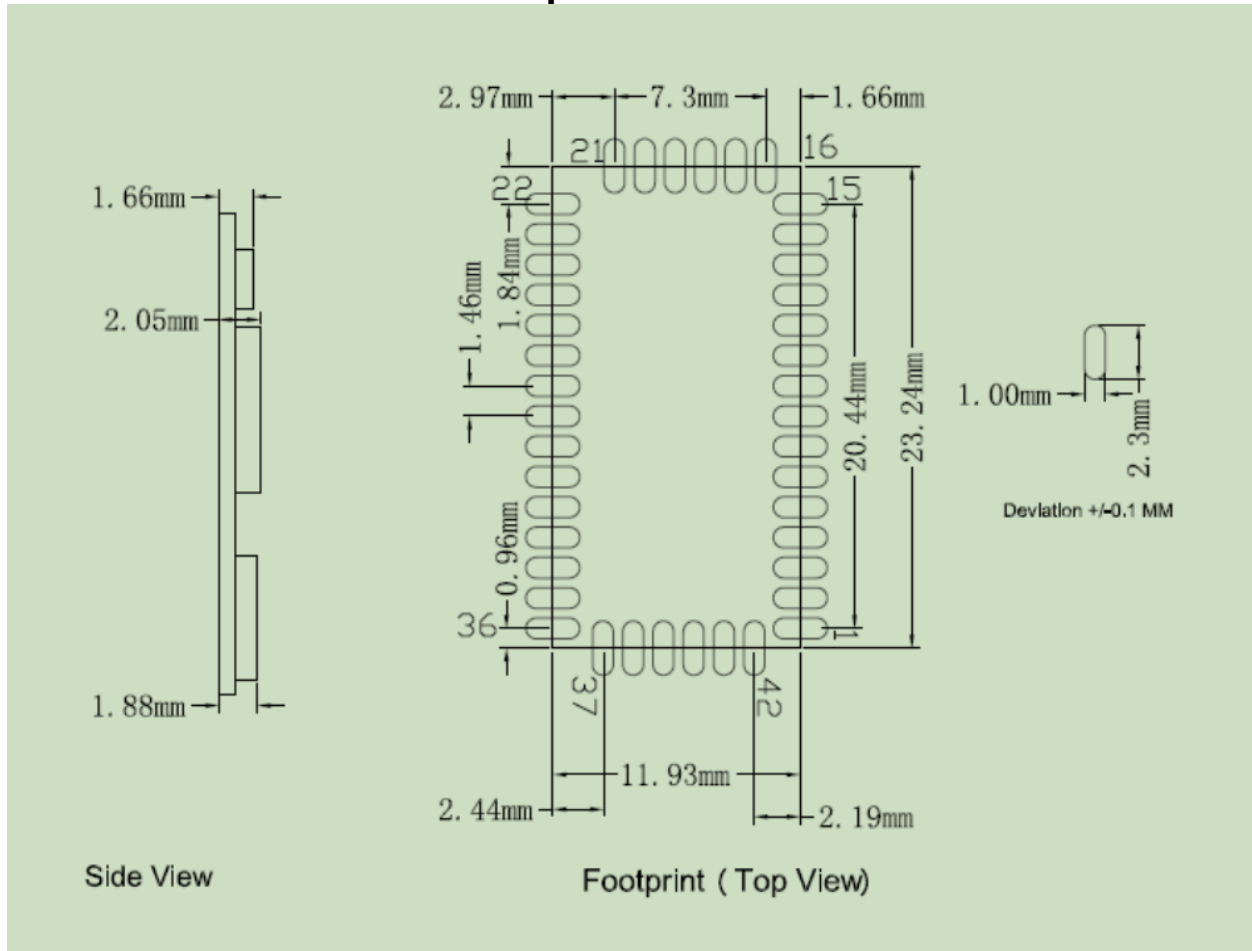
Recommended PCB Mounting Pattern (Unit: mm, Deviation:0.02mm)TOP View
